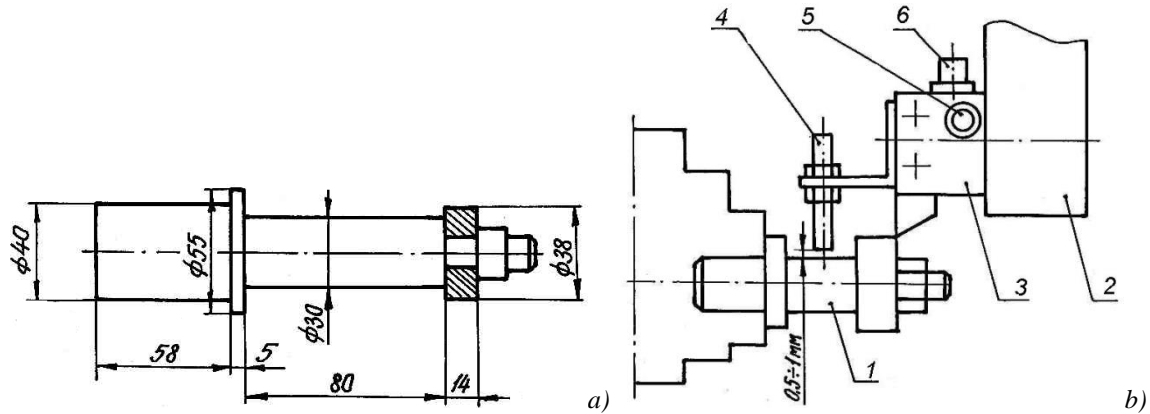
The dimensions of the mandrel with a set of replaceable sample parts (a) and the arrangement of sensors during the determination of the relative vibrations of the cutting tool and the workpiece during cutting (b), where 1 – the mandrel with the replaceable sample part, 2 – the faceplate of the turret head, 3 – toolholder, 4 – eddy current sensor, 5 and 6 – accelerometers
